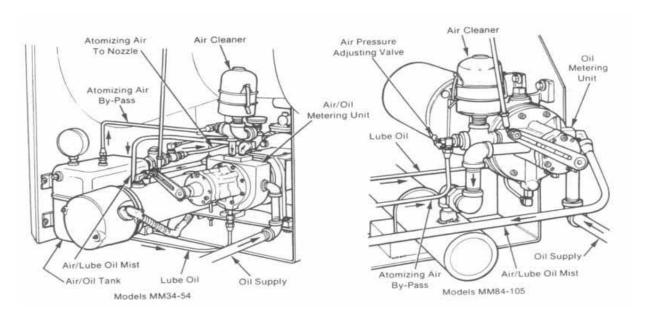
Burner Mounted Air-Oil Metering Unit
